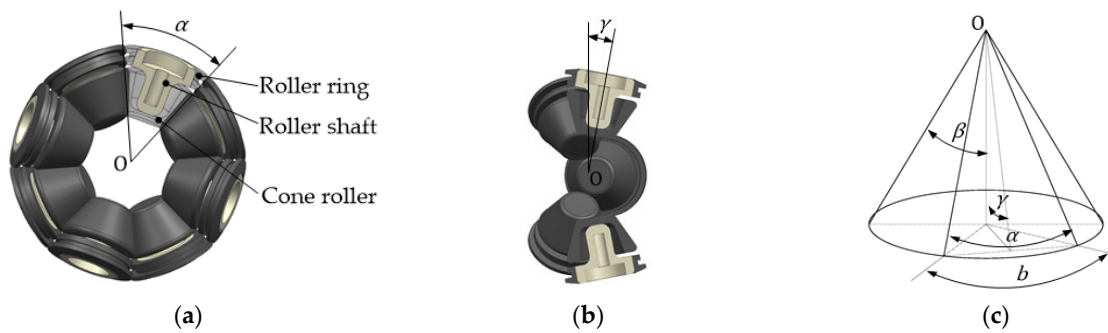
Structure principle of the stacked roller set: (a) front view of the stacked roller set; (b) side view of the stacked roller set; (c) projection of the cone roller.
